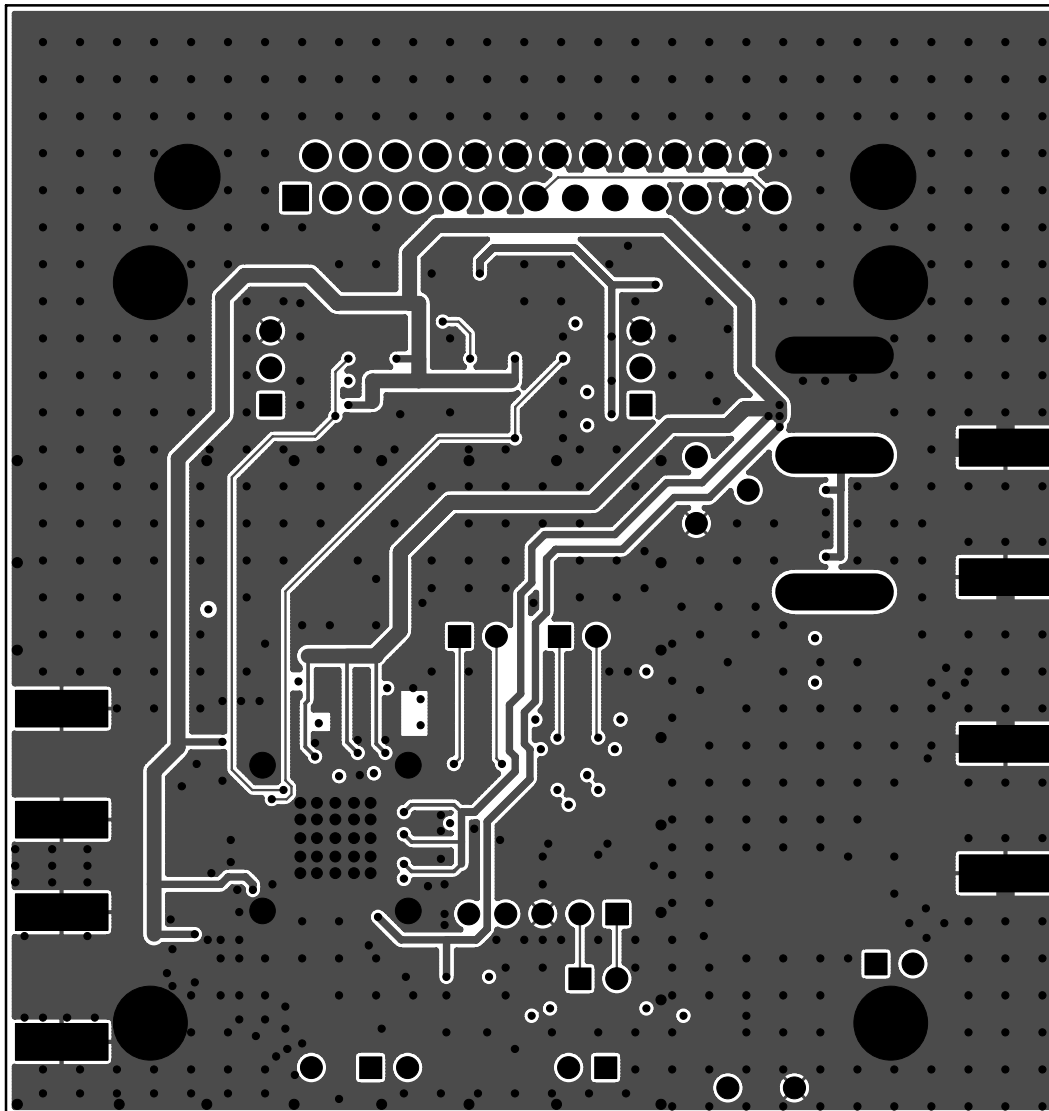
MAX3540 EV Kit PCB Layout—Secondary Component Side
